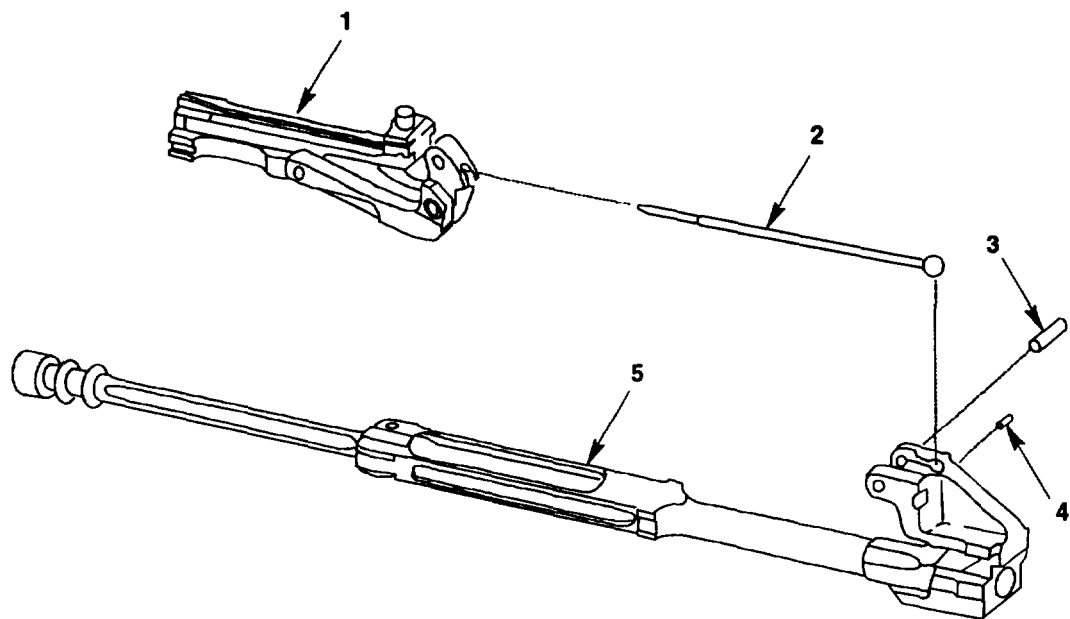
Bolt and Operating Rod Assembly, M240/M240C/M240E1, PN 11826070; M240B/M240G, PN 12976866
